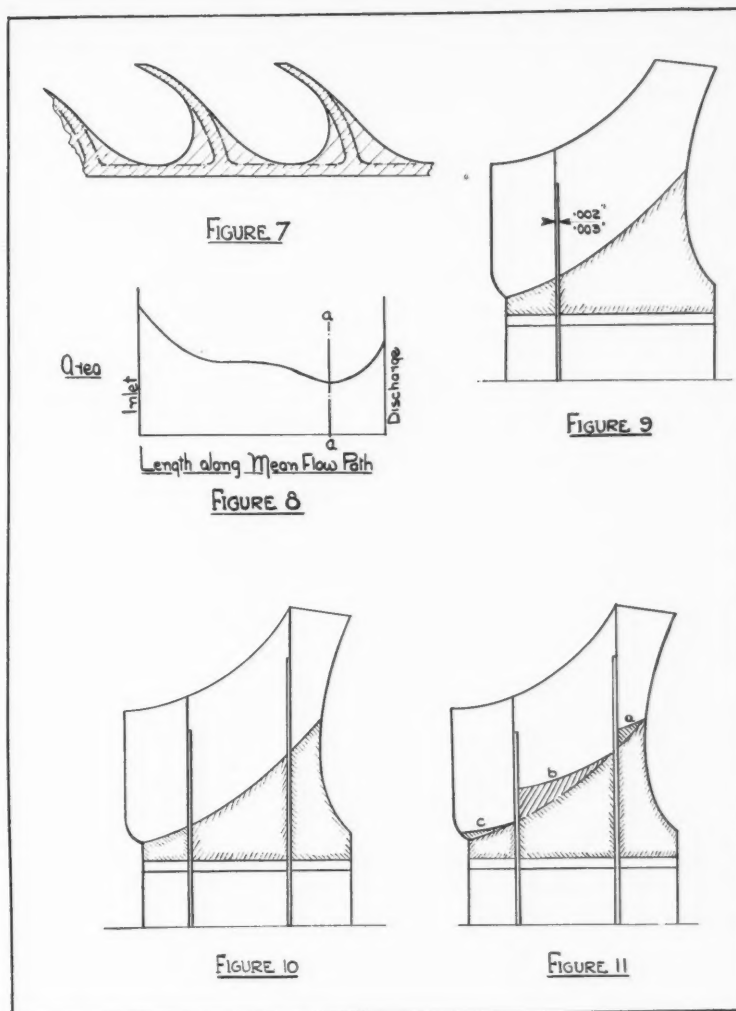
Cross-section through (a-a), Fig. 6, showing restriction of air flow caused by the fillets left by the large end of the cutter
